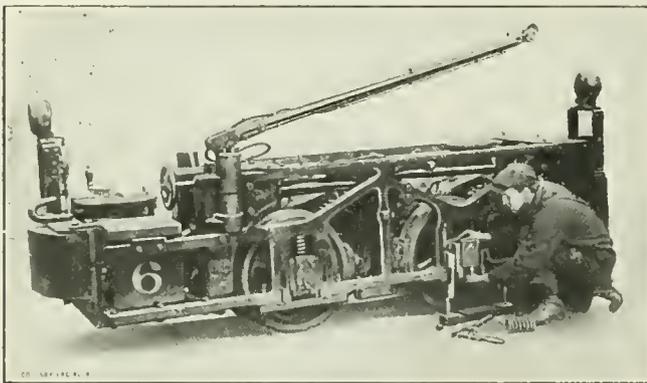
LOCOMOTIVE SHOWING REMOVABLE GIB
